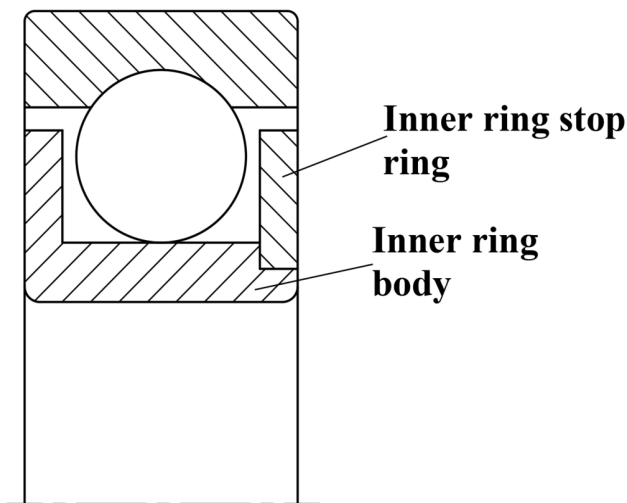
Bearing inner ring and full-ball bearing CN105134765.
